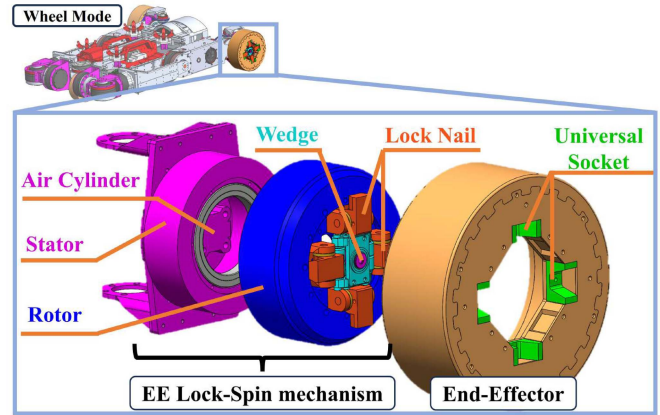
Overview of the EE Lock-Spin mechanism. Integrating the air cylinder inside the motor enables a compact structure. The Wedge is the structure that actuates the Lock Nail.
